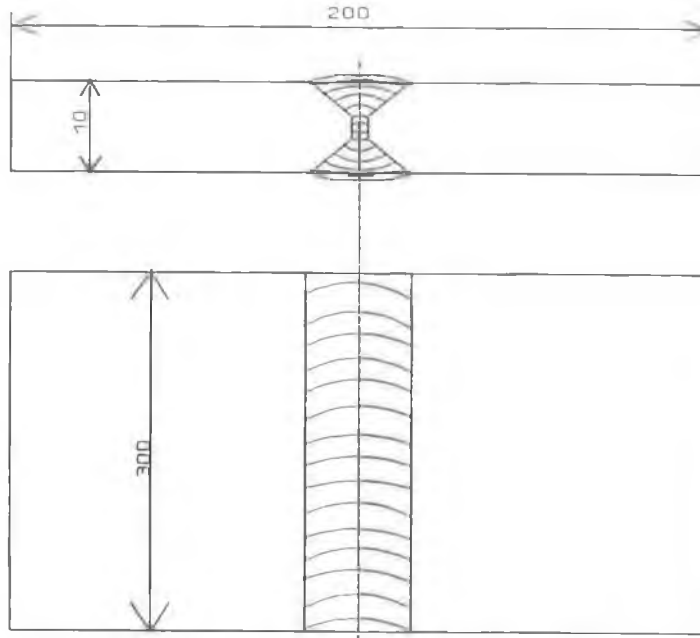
DRAWING OF THE DOUBLE-V CARBON STEEL COMPONENT.
